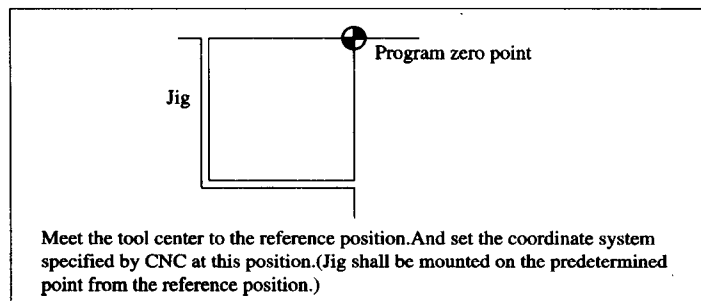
3(f) Mounting a workpiece directly against the jig
